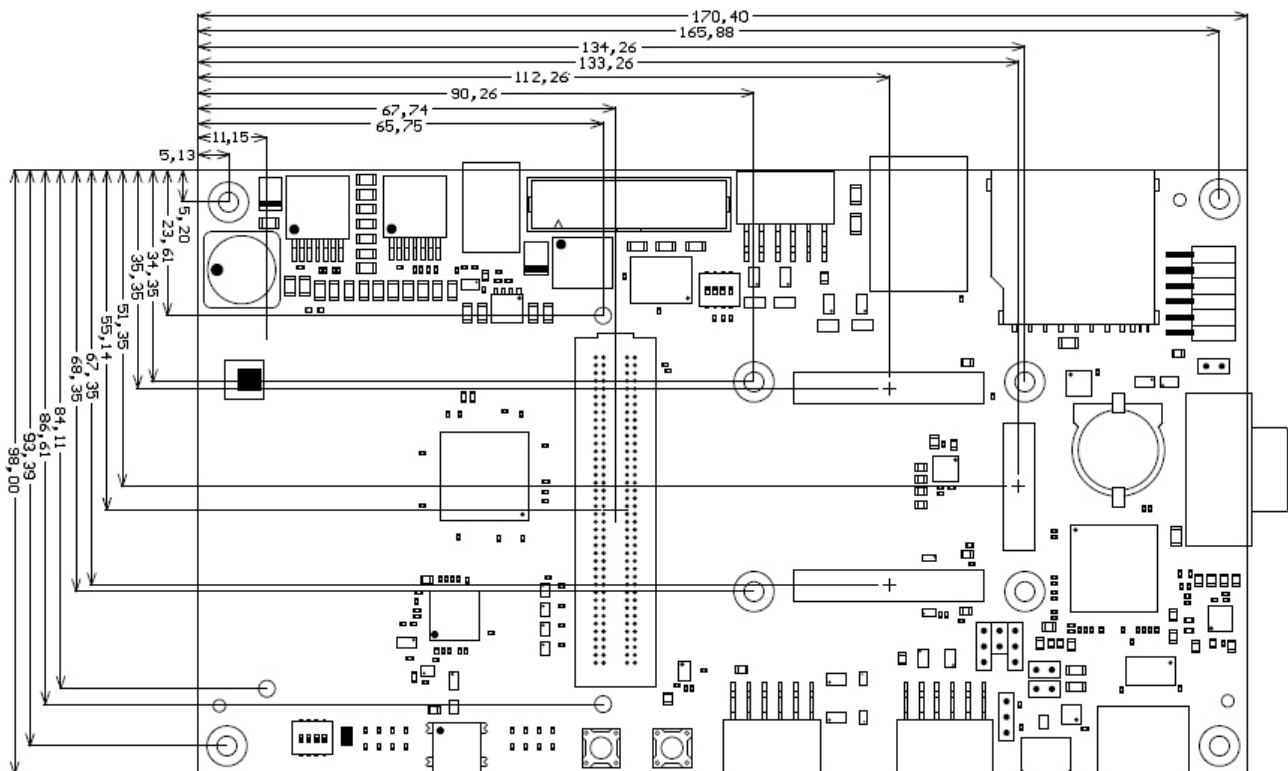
Physical dimensions of the TE0701-06 carrier board.
